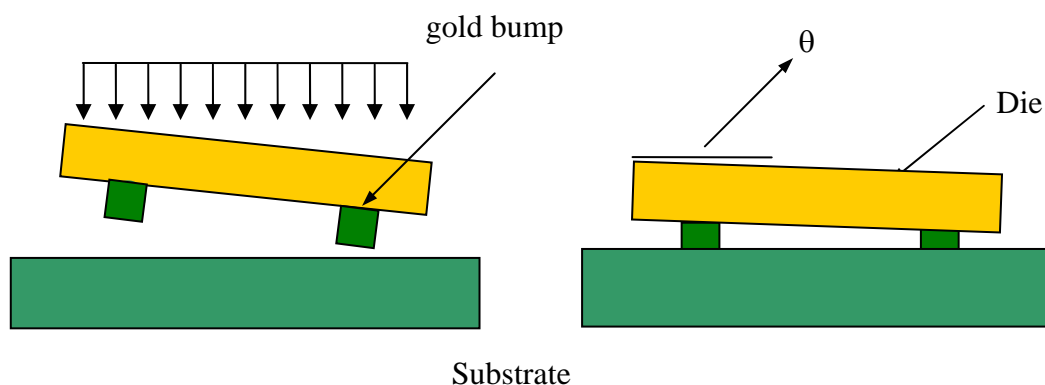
(a) Die tilting caused by poor co-planarity and (b) an inclined chip with tilt angle.
